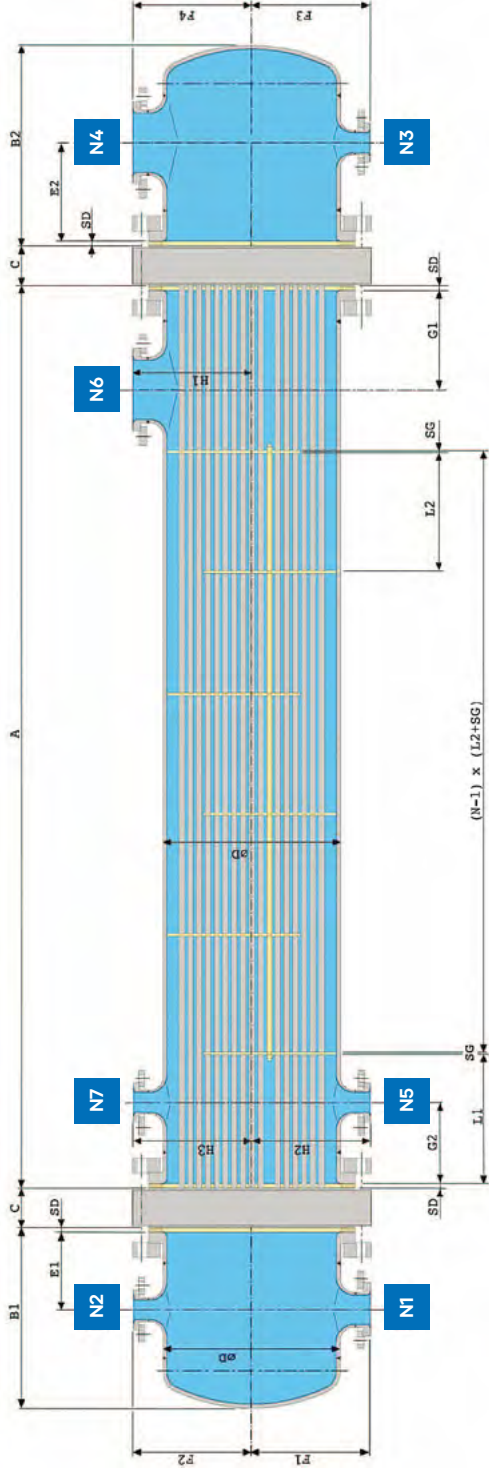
Double tubesheet shellside and tubeside glass-lining
